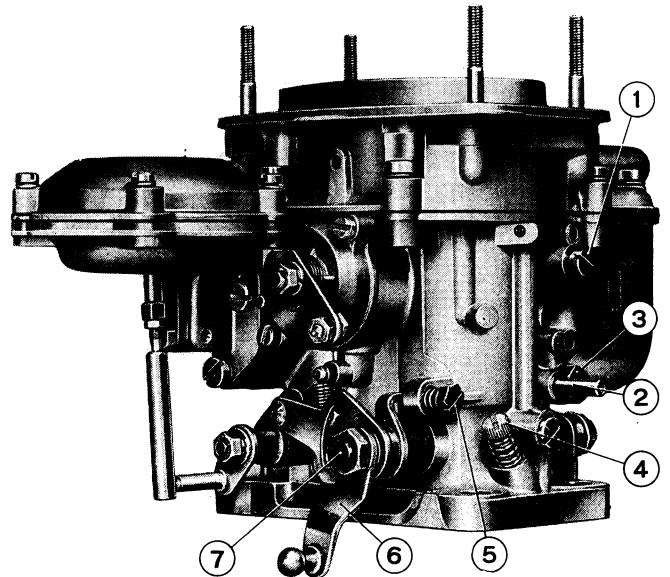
Weber 34 DCHD 4 carburetor for engine 115 C.005.
